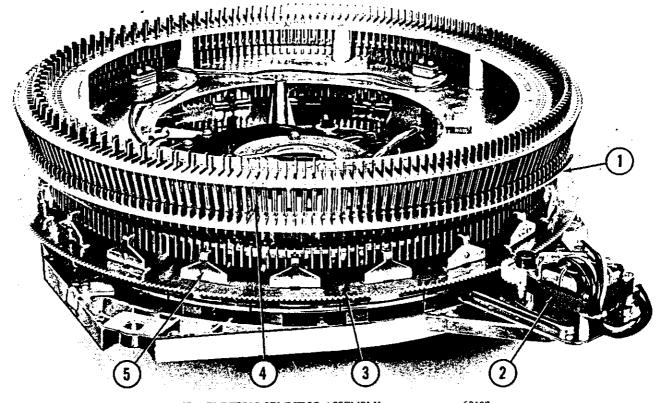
ELECTRIC SELECTOR ASSEMBLY
